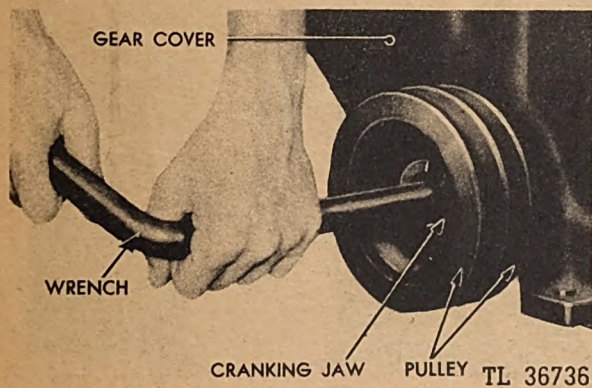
Removing Crankshaft Pulley Nut Jaw
